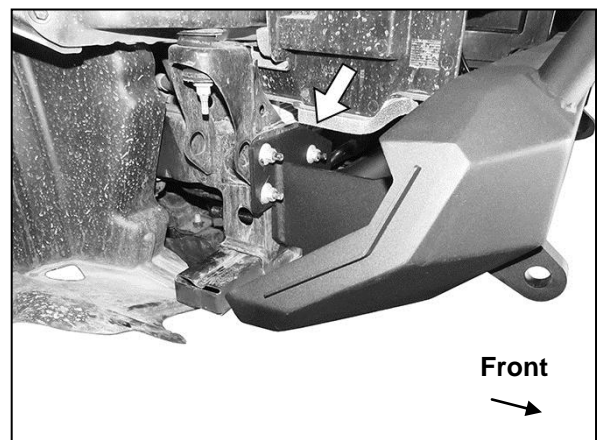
Cover the sides of the bumper with removable tape (masking tape for example)
